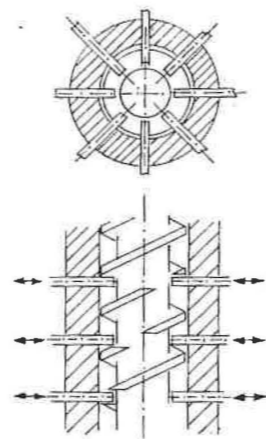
Pin barrel extruder (Quer Strom Misch Extruder).
